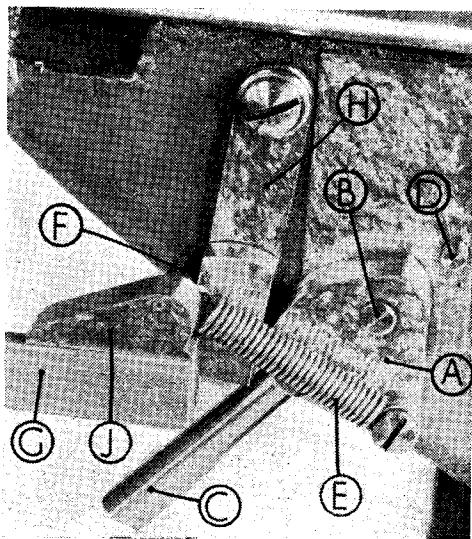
The dog-clutch disengaged. "A"—the cam; "B"—the cam pivot; "C"—the control lever; "D"—the stop-pin; "E"—the actuating spring; "F"—the spring attachment; "G"—the control bar; "H"—the cam follower; "J"—the spring bracket
